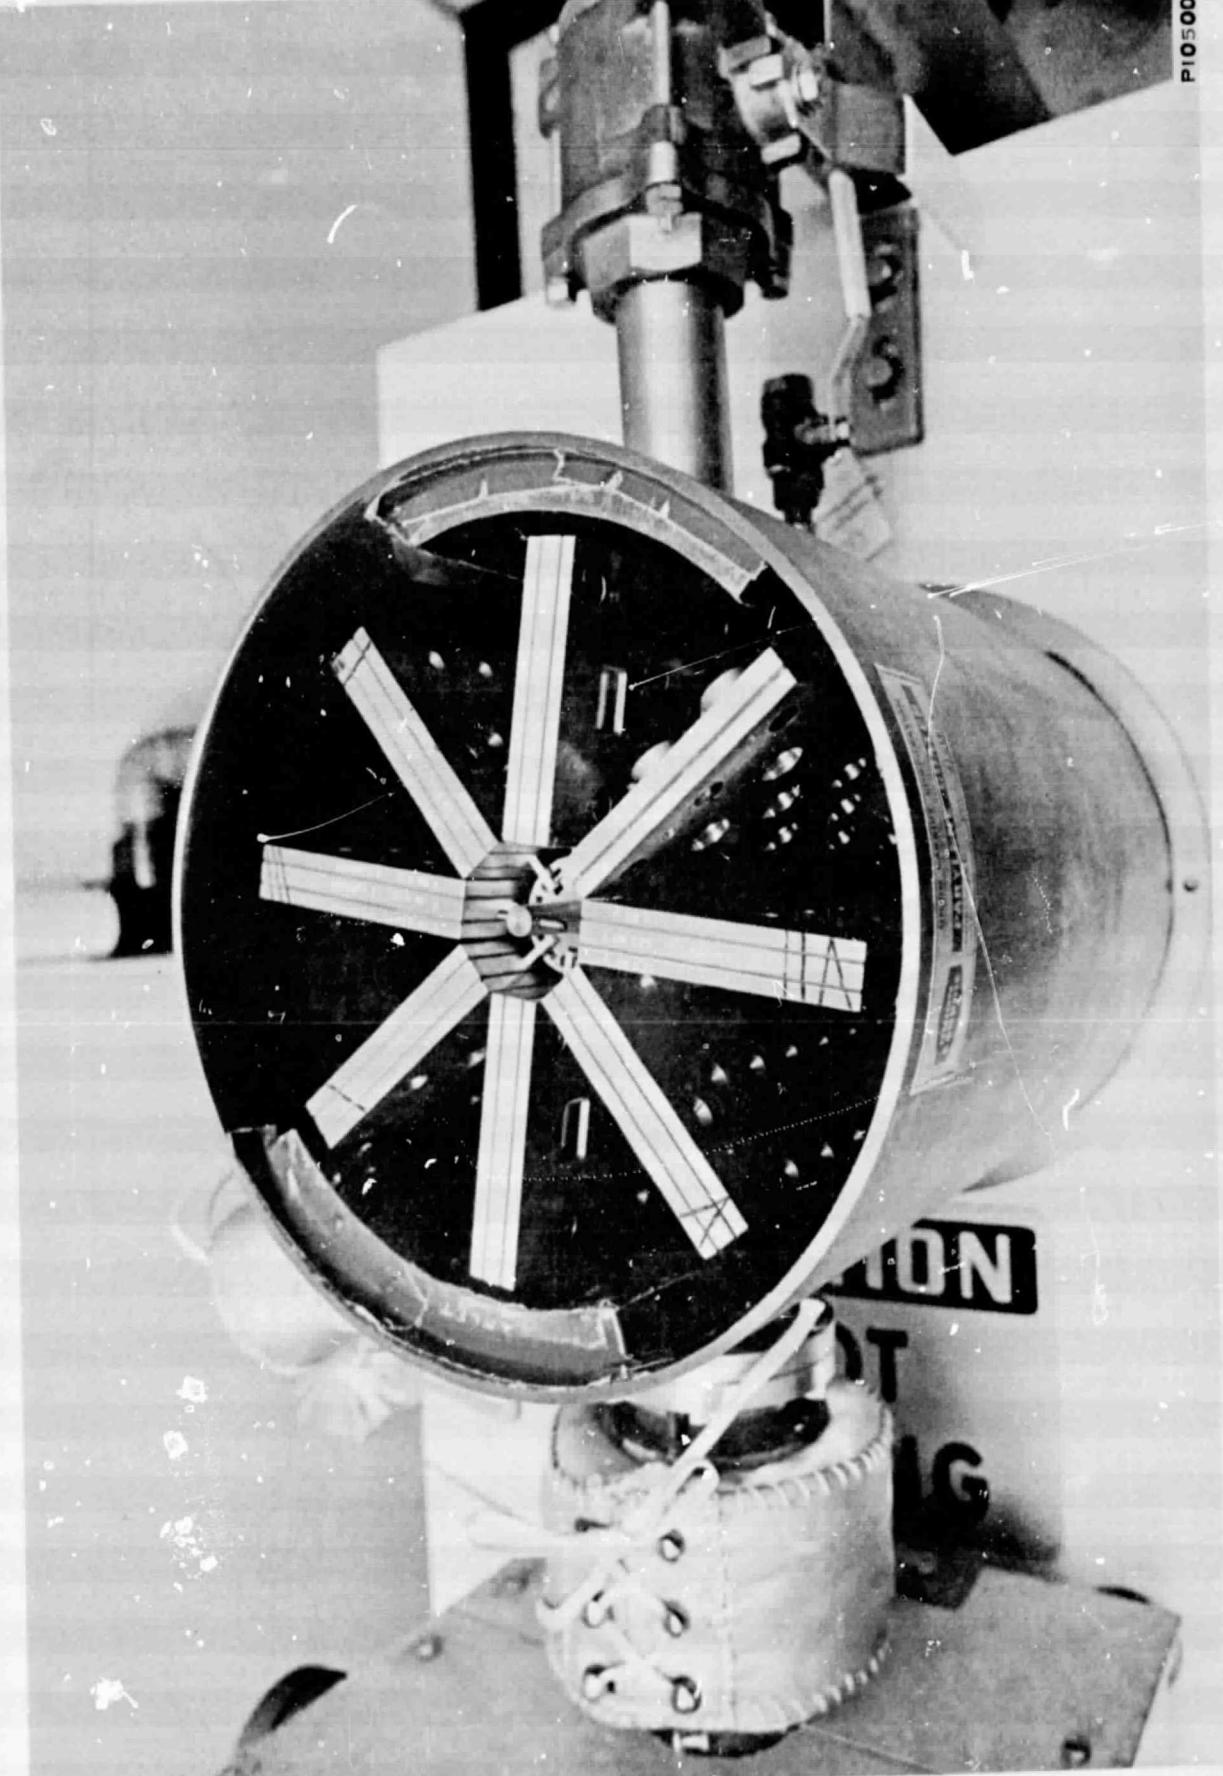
Parylene deposition chamber fully loaded with fixturing.
